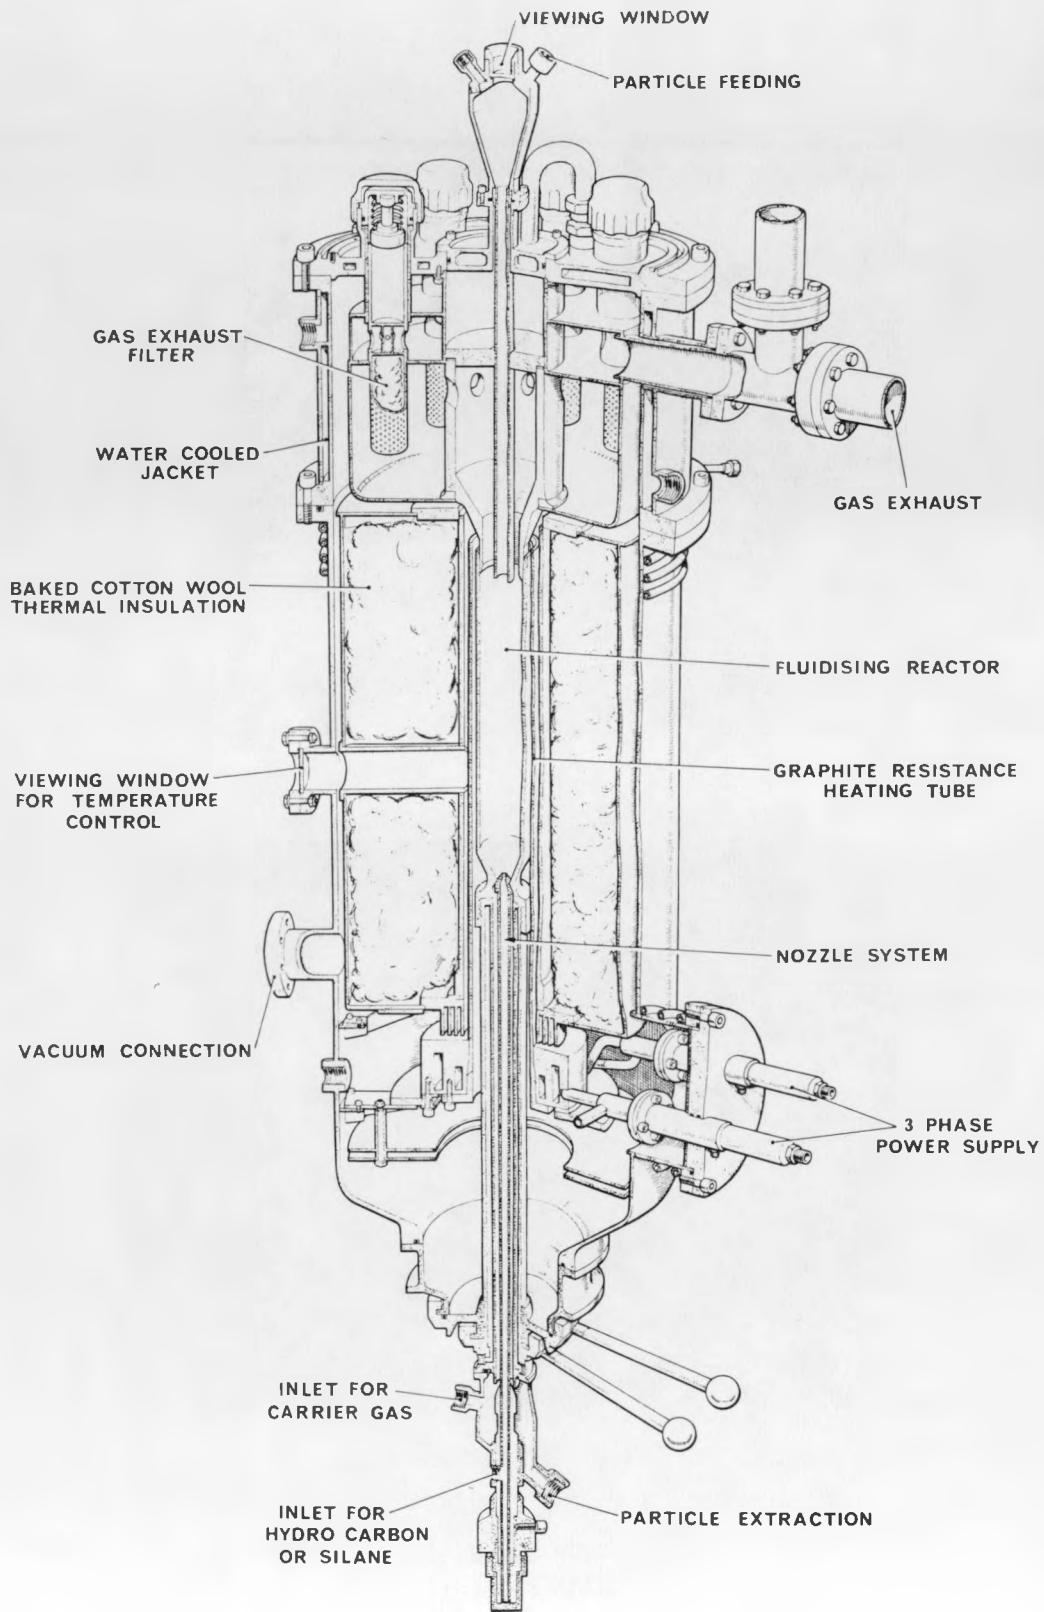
PROTOTYPE PRODUCTION SCALE FLUIDISED BED
